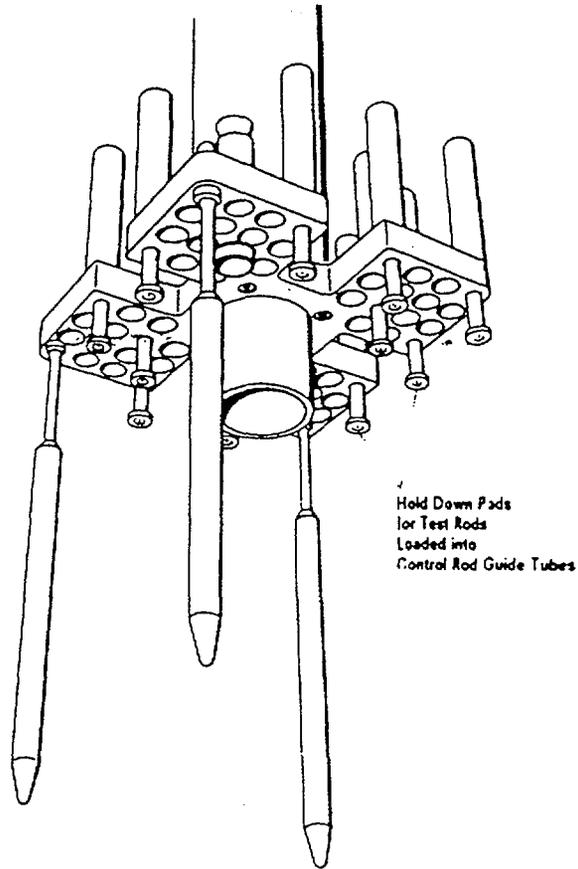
Coupon Test Assembly in BWR Water Channel. The same Design is used for Control Rod Guide Tubes for in-PWR Testing
